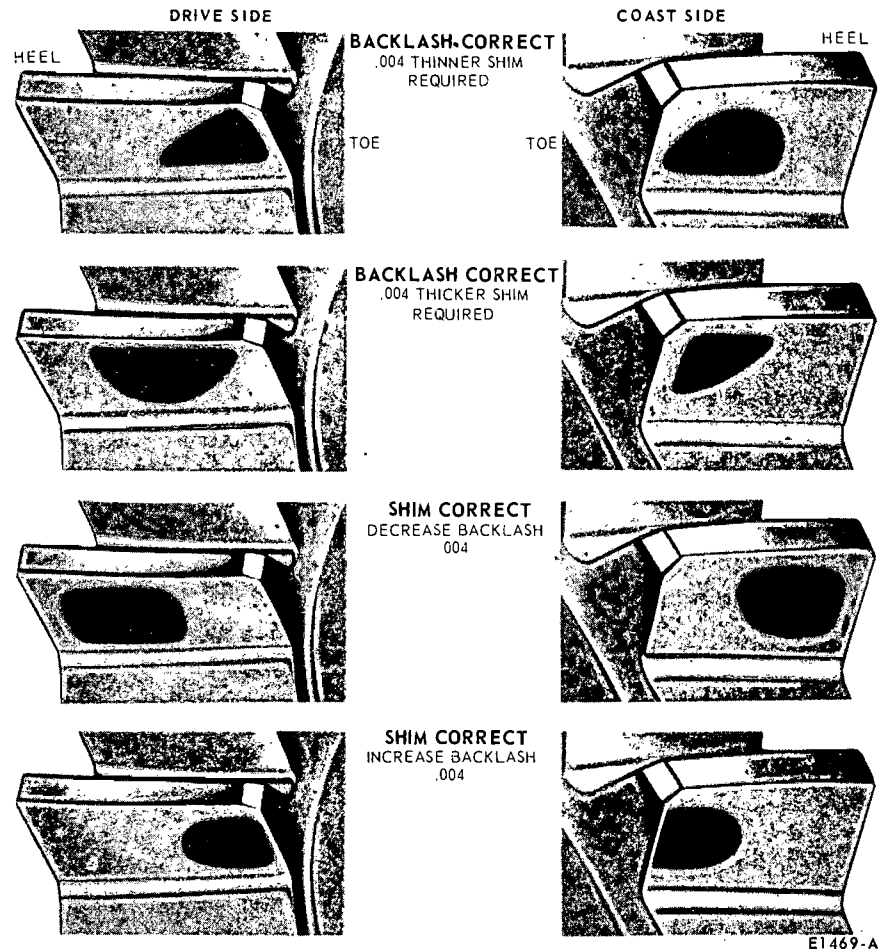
Typical Gear Tooth Contact Patterns Indicating Shim or Backlash Change—Integral Carrier Type
